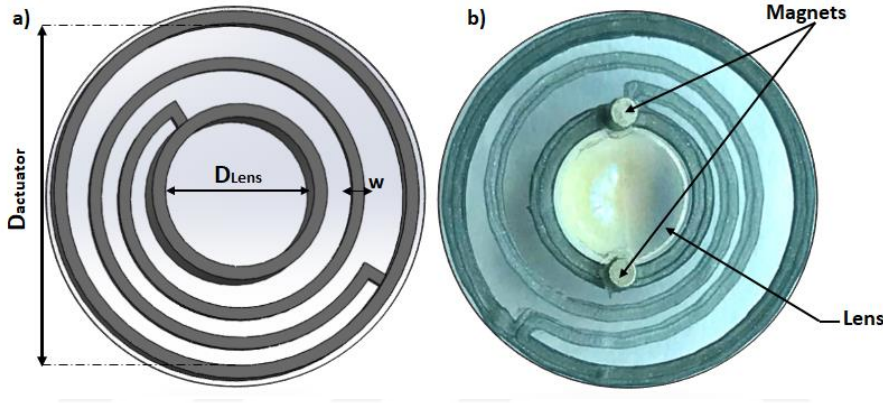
The presented spiral actuator. a) CAD drawing. b) 3D printed with two magnets glued and a focusing lens (Thorlabs 354171, NA: 0.3) inserted in the middle.
